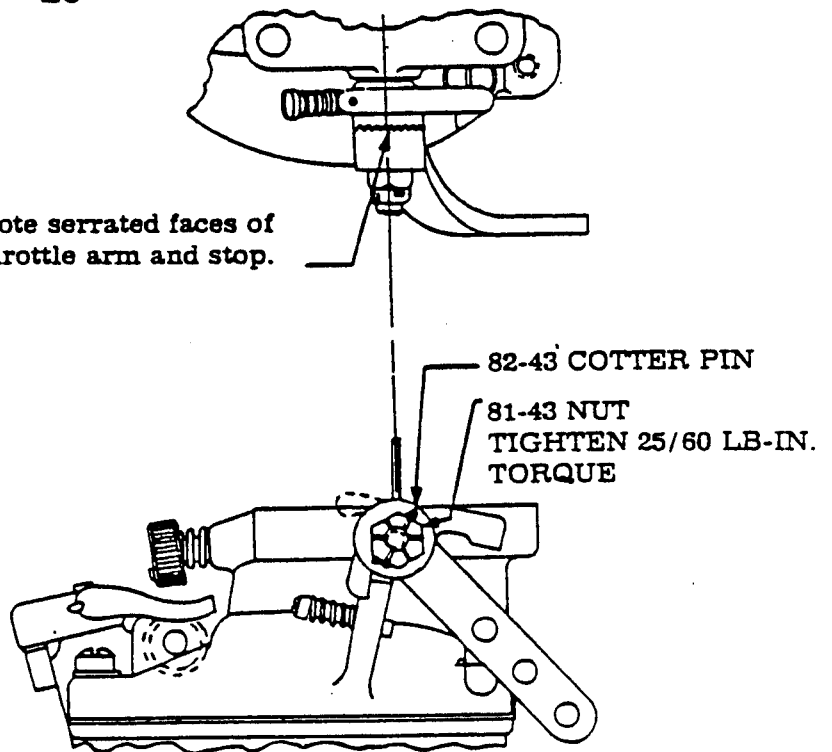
Throttle Control and Throttle Arm to Idle Stop Adjustment
